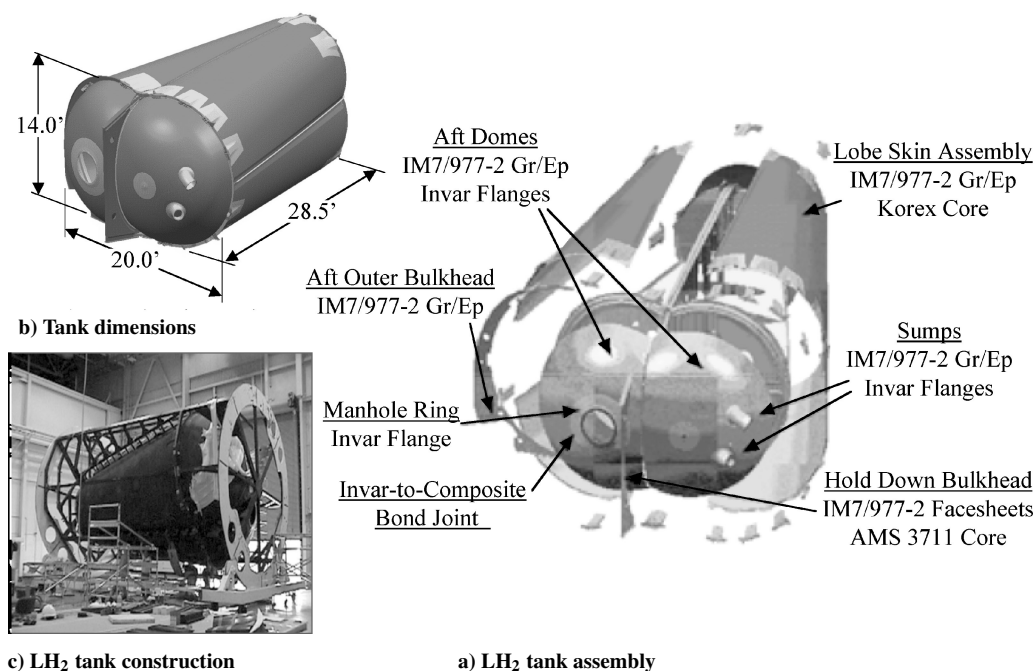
X-33 liquid-hydrogen composite tank assembly.²
